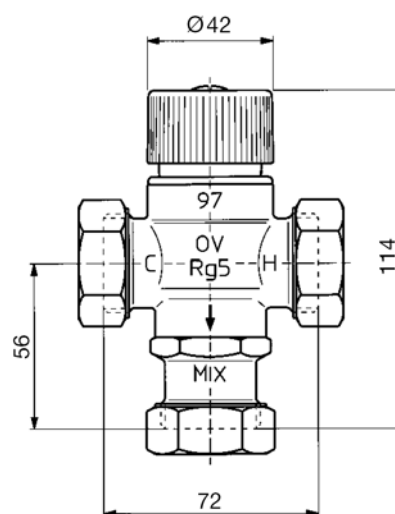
Dimensions BM Thermostatic mixing valve (in mm).
